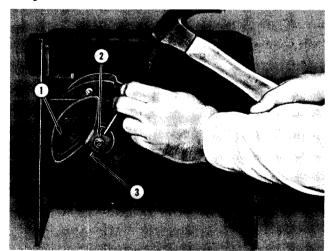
REMOVING ROLL PIN 1. Cam 2. Pivot Shaft 3. Roll Pin
